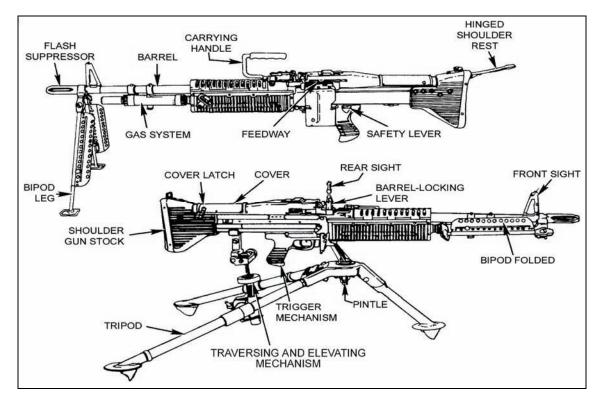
M60 machine gun, bipod- and tripod-mounted.
